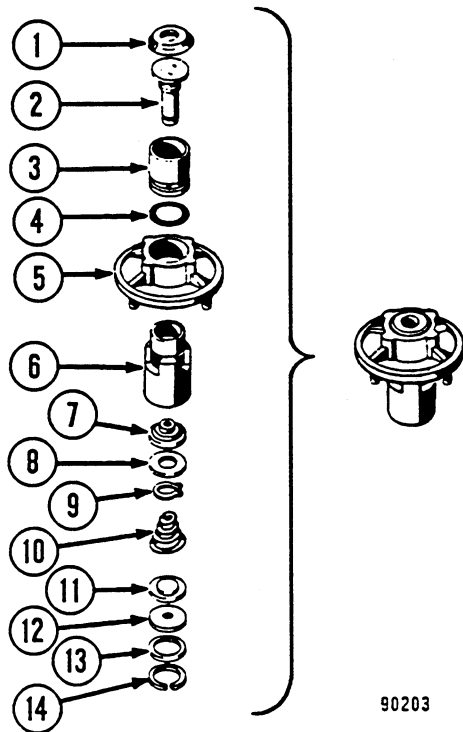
BARRIER PLATE ASSEMBLY
